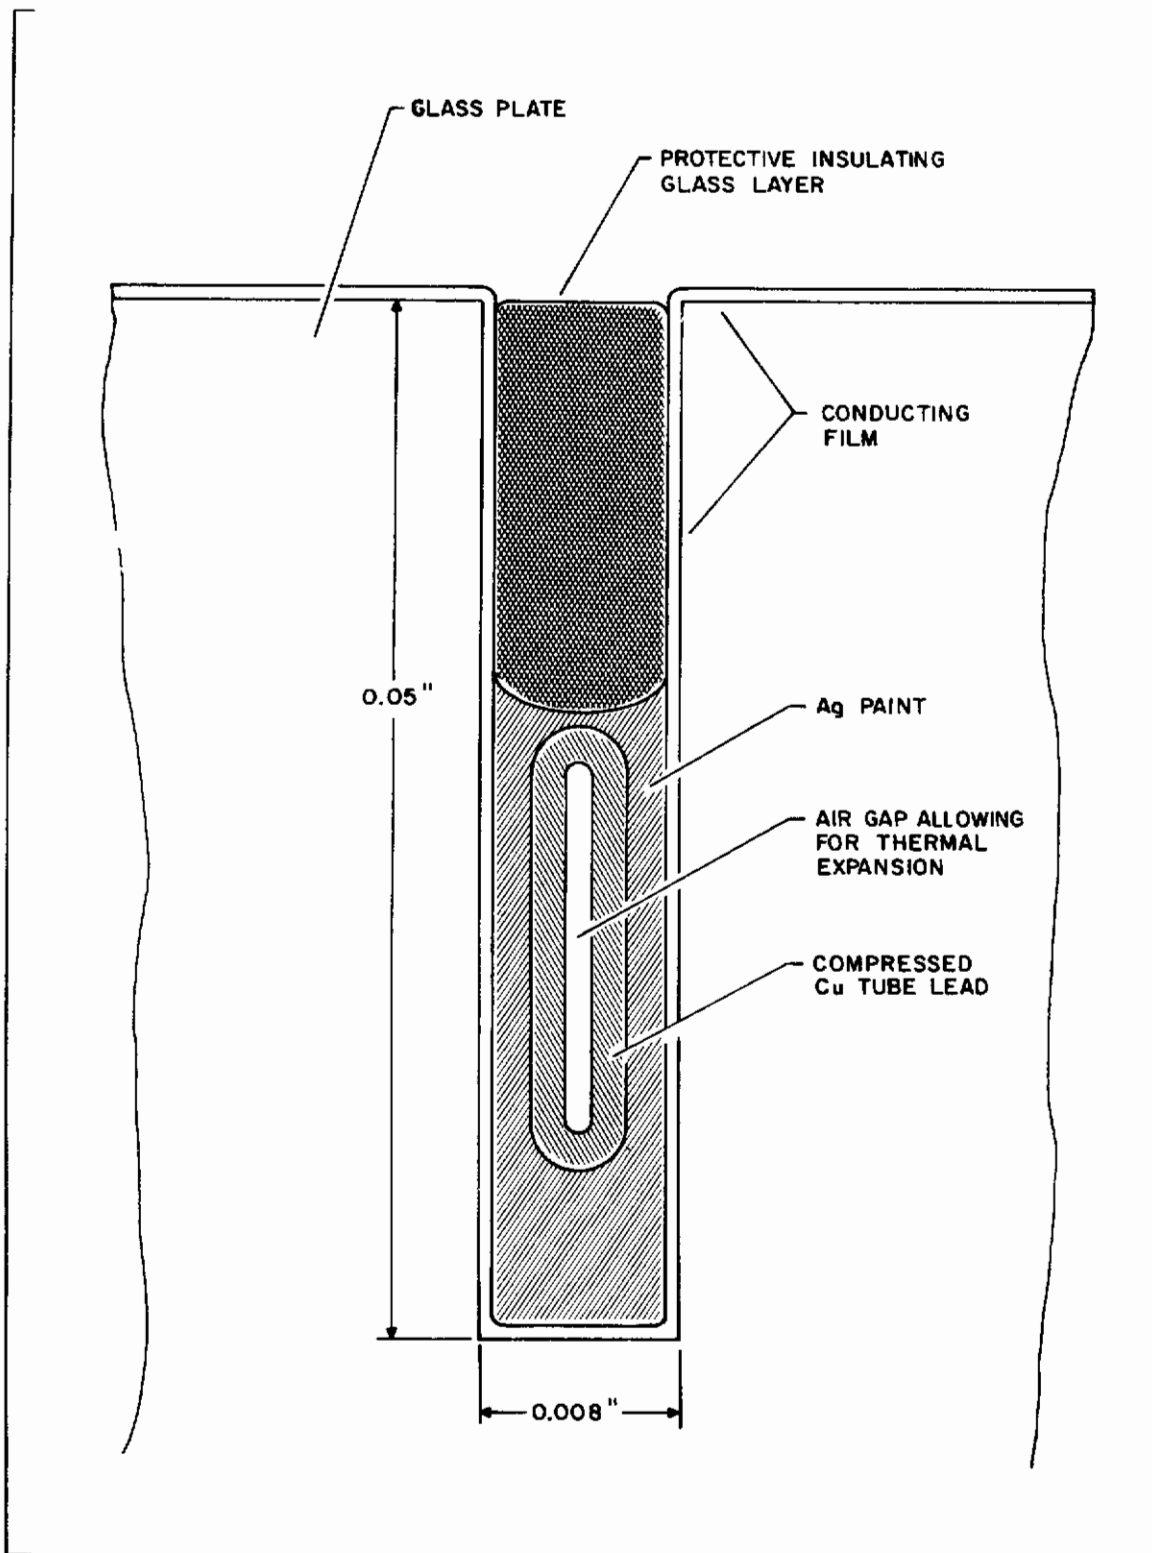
SCHEMATIC CROSS SECTIONAL DRAWING OF GROOVE, CONTACTING LEAD, AND PROTECTIVE LAYER
